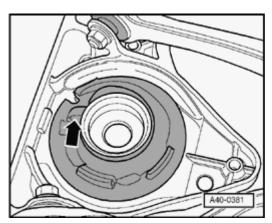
Upper Spring Support Location Courtesy of VOLKSWAGEN UNITED STATES, INC.
